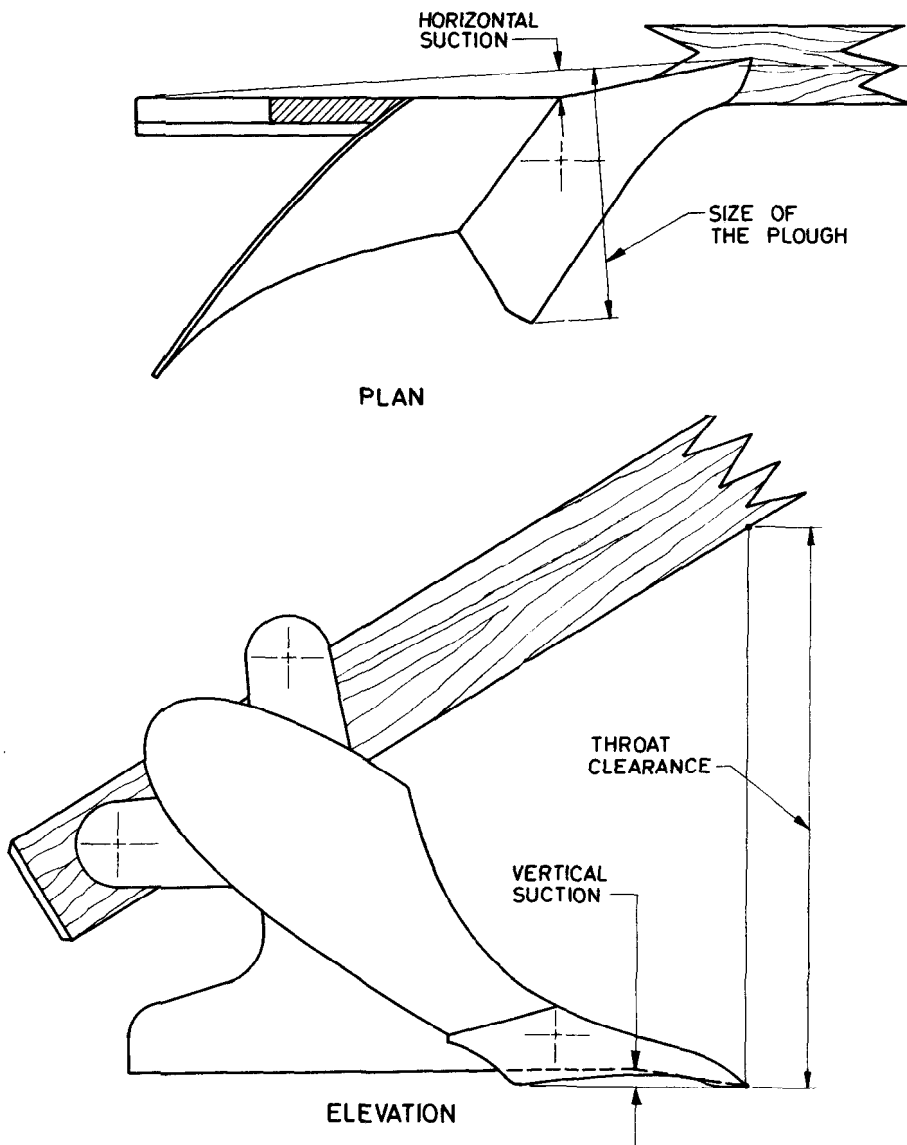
MEASUREMENT OF SIZE, SUCTION AND CLEARANCE OF THE MOULDBOARD PLOUGH, FIXED TYPE
